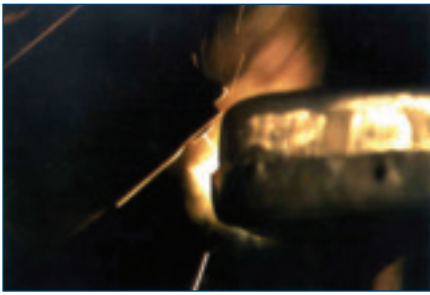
View of a NVEBW beam producing a 45-deg angled fillet weld.
